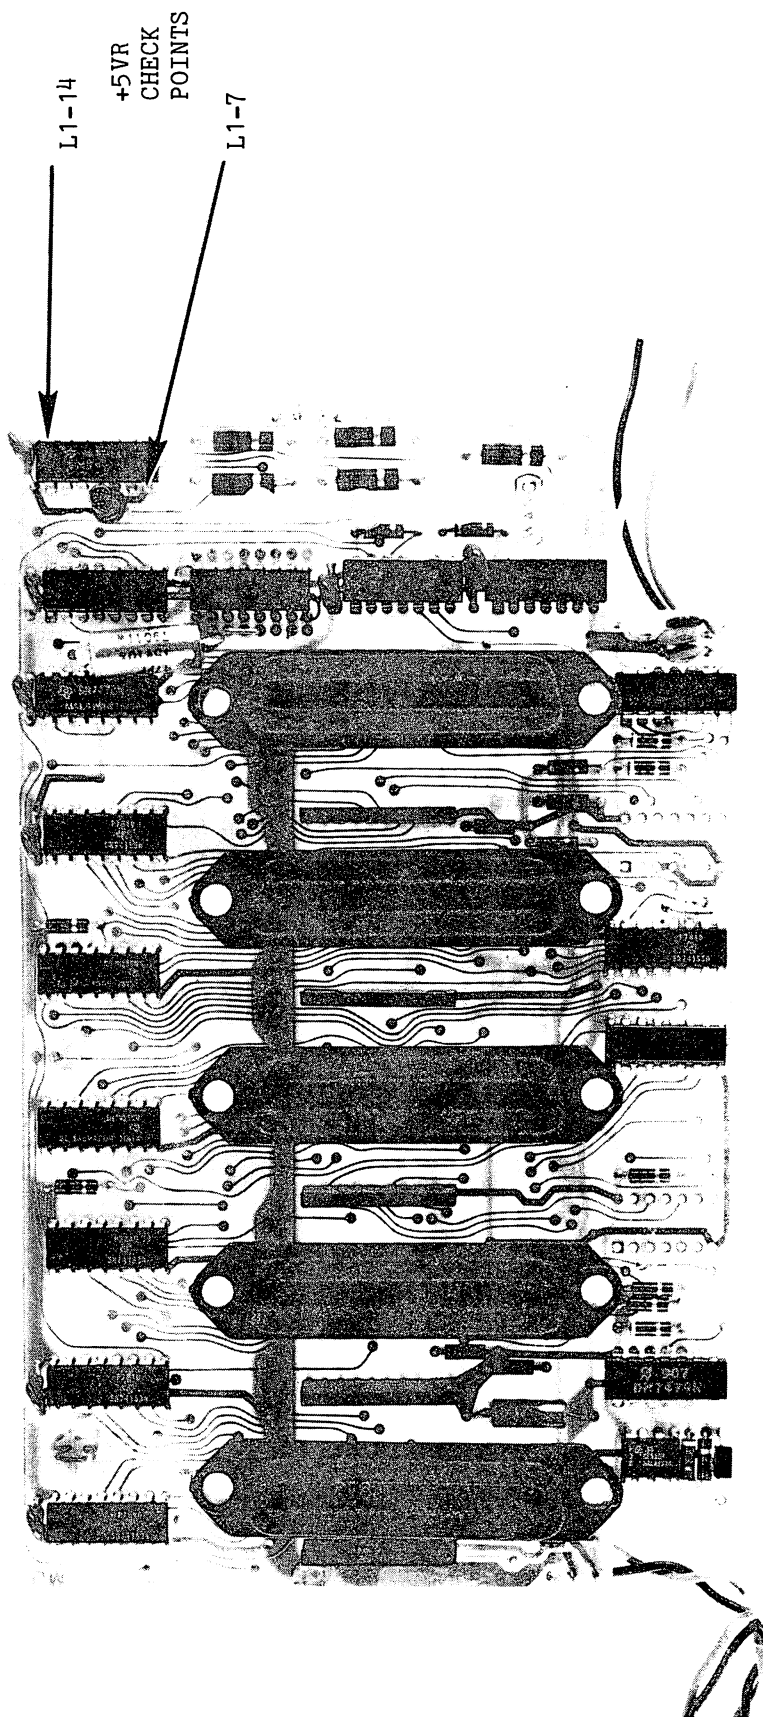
210-7430 PCB; +5VR CHECK POINTS
